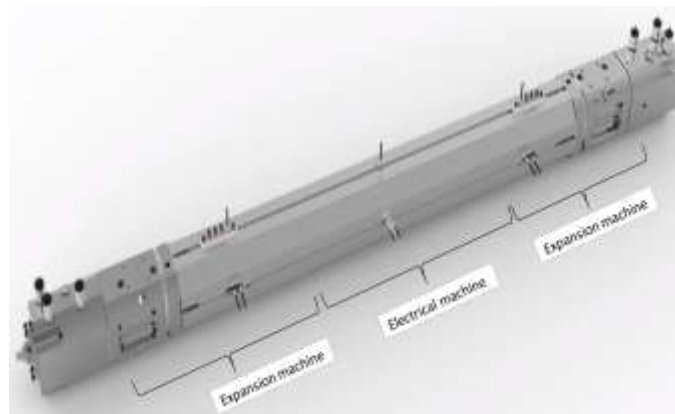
CAD of Linear piston expander with an integrated electrical machine
